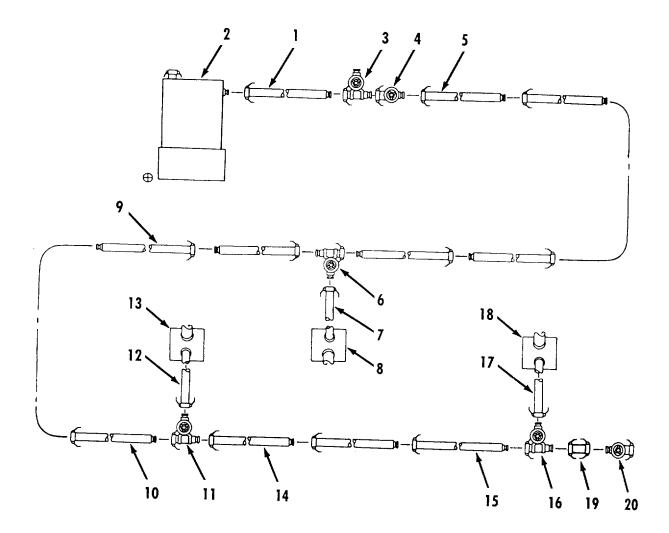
Fuel System - Fuel Tank Discharge to Secondary 600 GPM Pump Input Removal.
